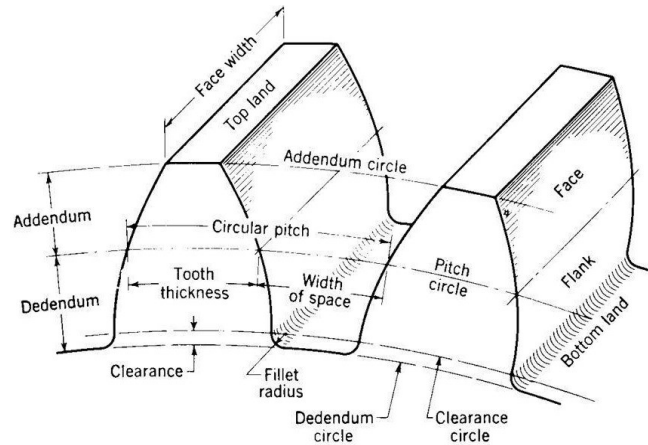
Parameters that define the shape and size of a gear, using a spur gear as an example [251]
